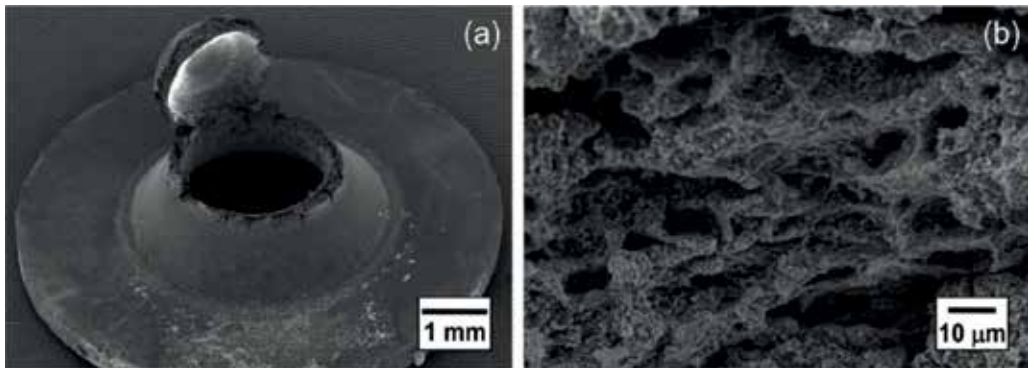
(a) A typical SP creep ductile fracture surface for a test on HN9L at 725°C at 140N and (b) fracture surface depicting ductile transgranular mode of fracture [28].
